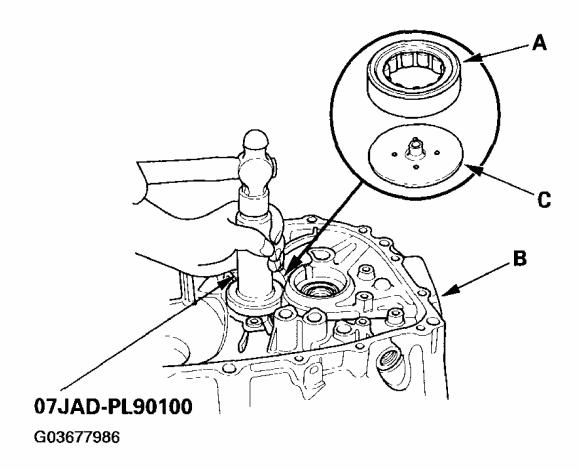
Positioning Oil Guide Plate And Needle Bearing In Bore Of Clutch Housing
